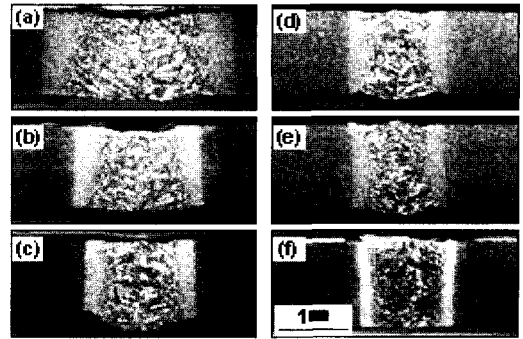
Cross sections of the bead with the welding speed (a) 2.1, (b) 3.0, (c) 3.6, (d) 4.8, (e) 6.0, (f) 7.2m/min
